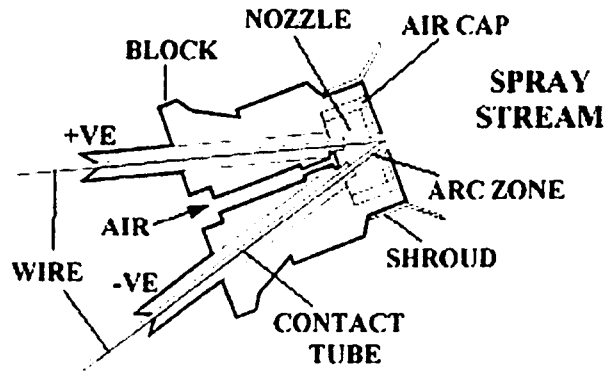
Illustration of Spray Metal Tooling (www.metal-spray.co.nz)
